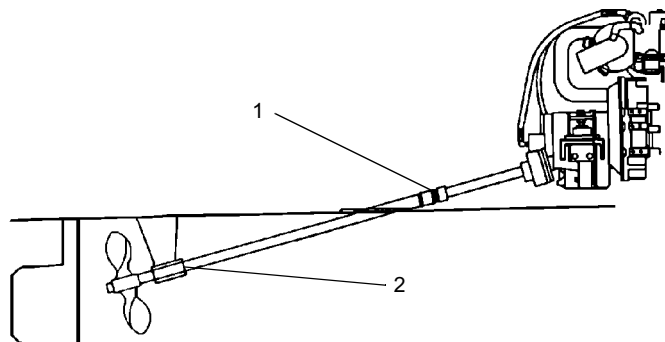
Propeller Shaft Support for a Flexibly Mounted Engine
